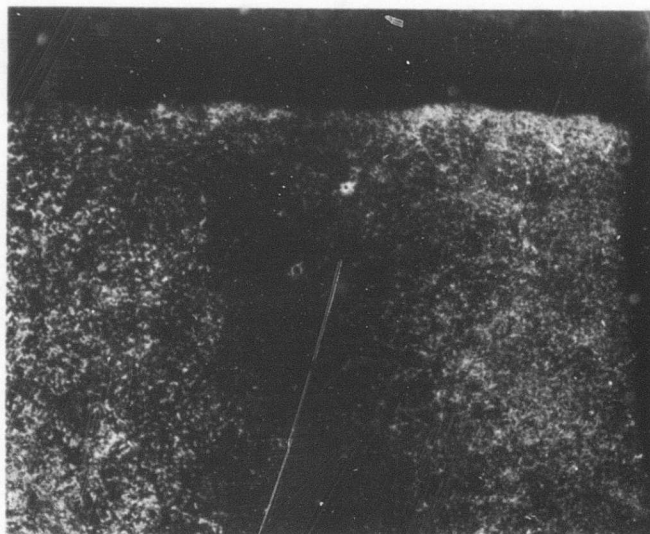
Detail View of Failure Surface, Showing Progressive Failure Originating Near the Center of the Involute Base Indicated by the Arrow.
